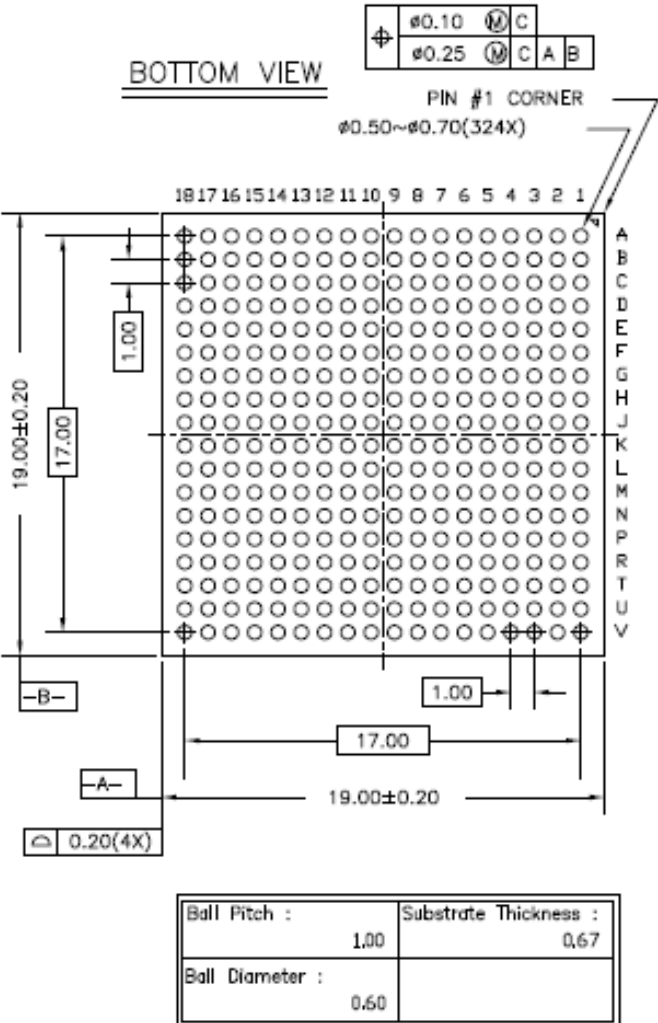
324-Pin FCBGA Package Mechanical Drawings - Bottom View
